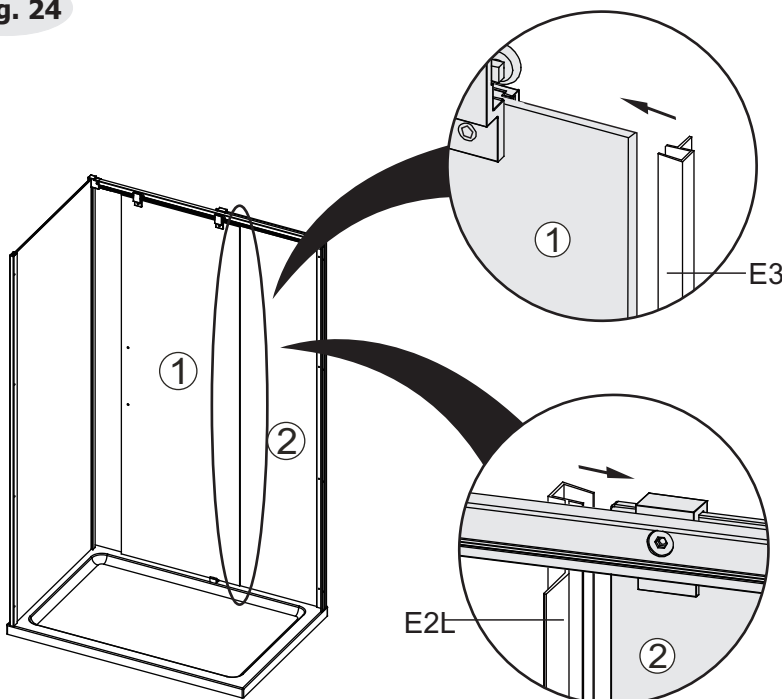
Install the fixed panel seal (E2L) on the fixed panel. Install the door panel seal (E3) on the door panel.
